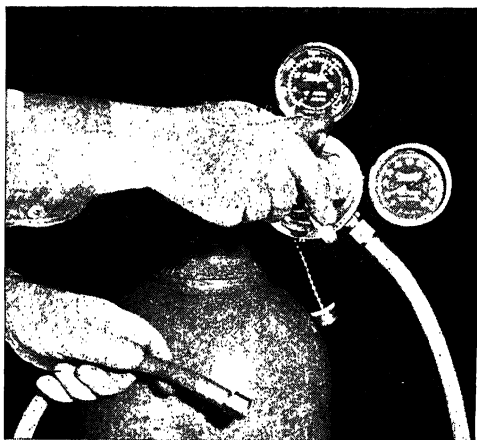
Blowing dust from hose. (*Courtesy of Linde Air Products Co.*)
